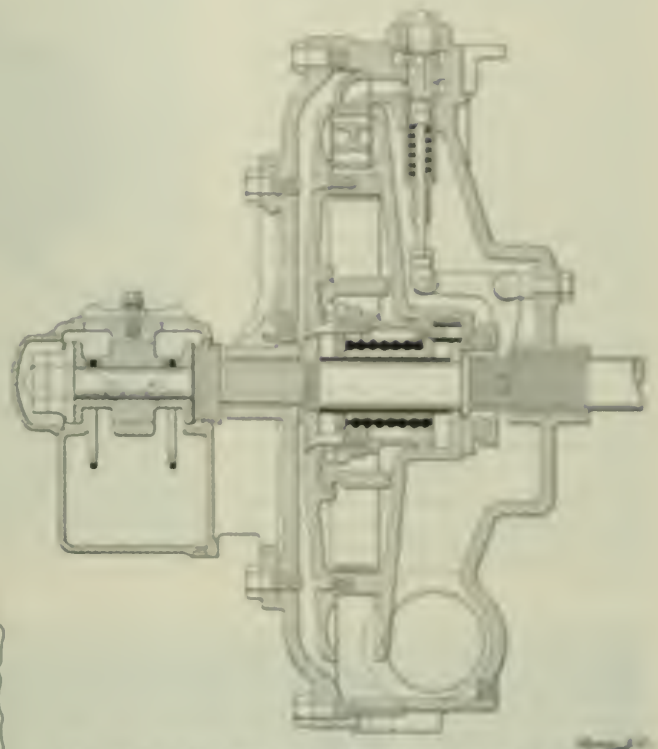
SECTION OF JAKE BURNETT-TURBINE SECTION.
